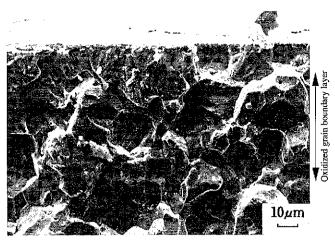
Fracture of a rotary bending test piece tested by an Ono tester
